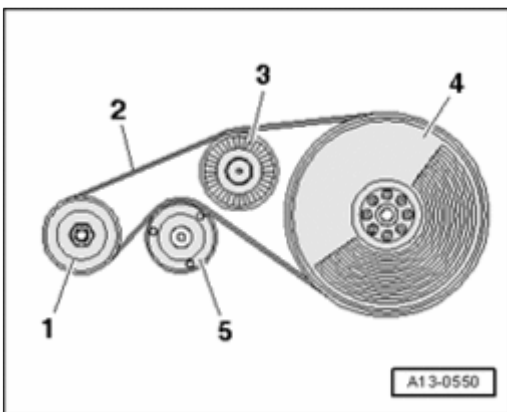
Placing Ribbed Belt Over Belt Pulley In Specified Sequence
